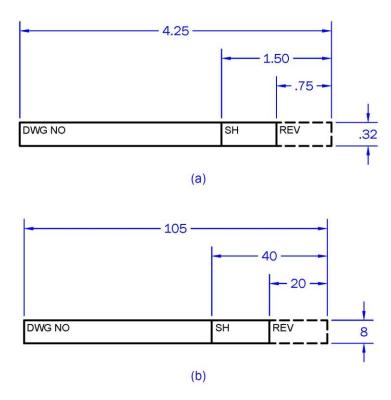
(a) Margin drawing number block dimensions recommended by ASME Y14.1 for all inch-size sheets. (b) Margin drawing number block dimensions recommended by ASME Y14.1M for all metric-size sheets.
